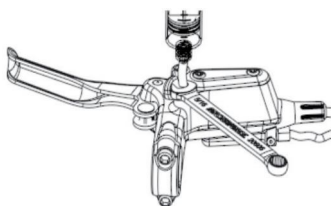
8mm open end spanner to loosen/tighten the main body of the caliper into the nozzle screws.
